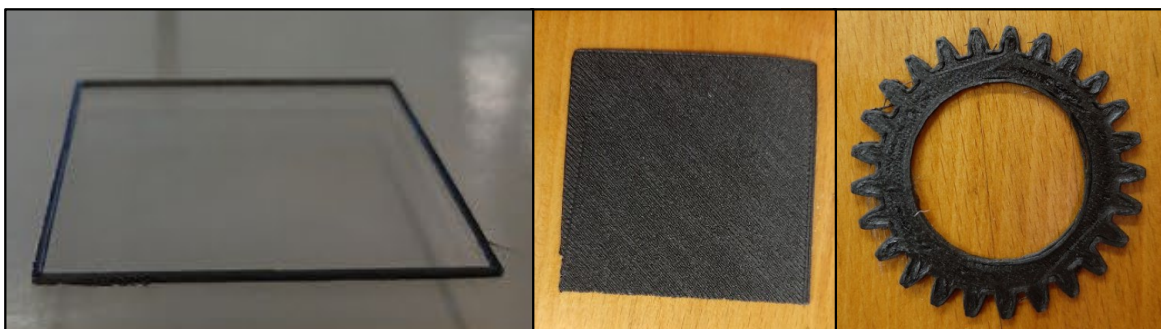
First 2D objects obtained with printer converted to Continuous Fibre Fabrication (CFF) technology
